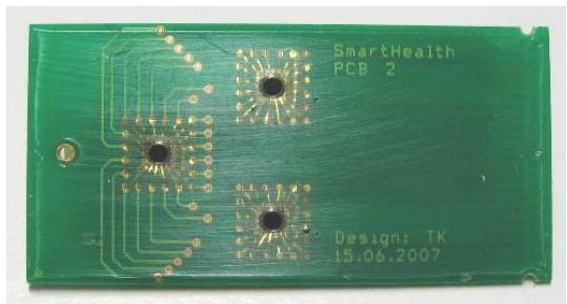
Photograph of a coated PCB containing three CDR-chips.
